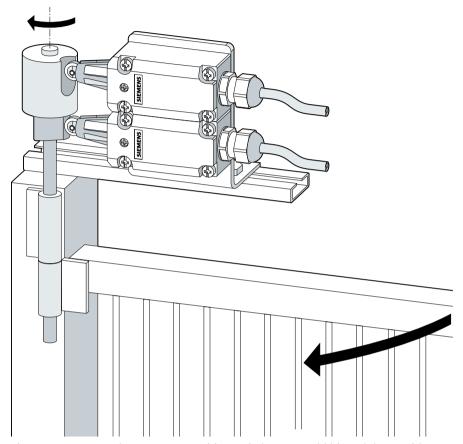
Example: Two 3SE5 position switches on Brühl hinged doors with mounting accessories
